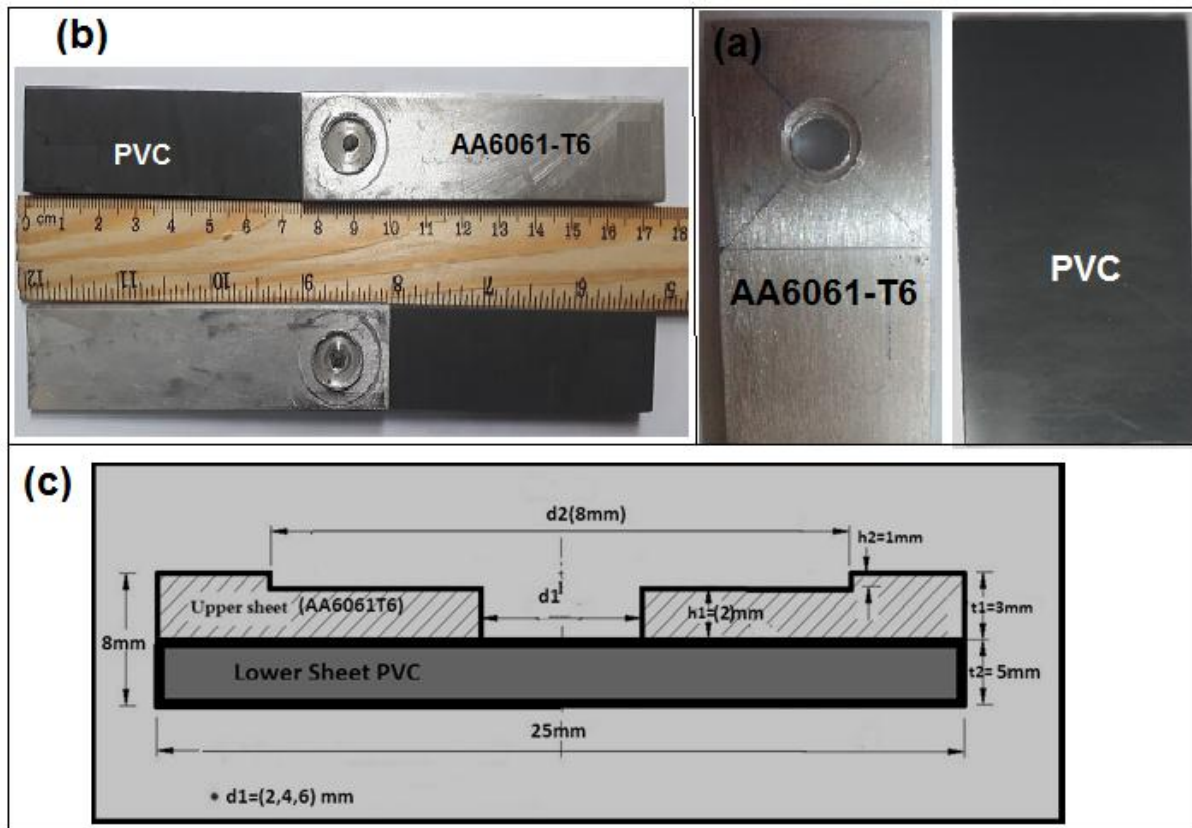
The manufactured samples of the AA6061-T6 and PVC. (a) AA6061-T6 with two holes and PVC, (b) schematic of lap joint, (c) cross-section dimension of the lap joint with holes.
